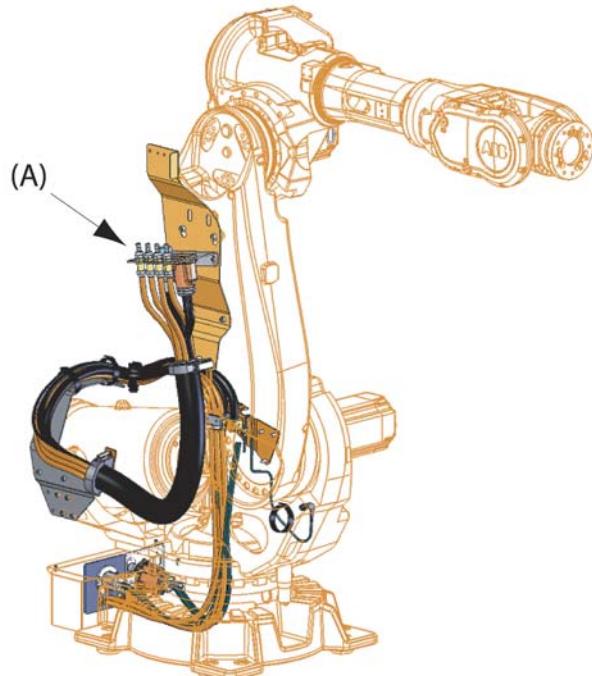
DressPack Lower arm left side view Spot Welding (option 778-1/778-2 and option 798-2). Spot welding applicaton shown above.
